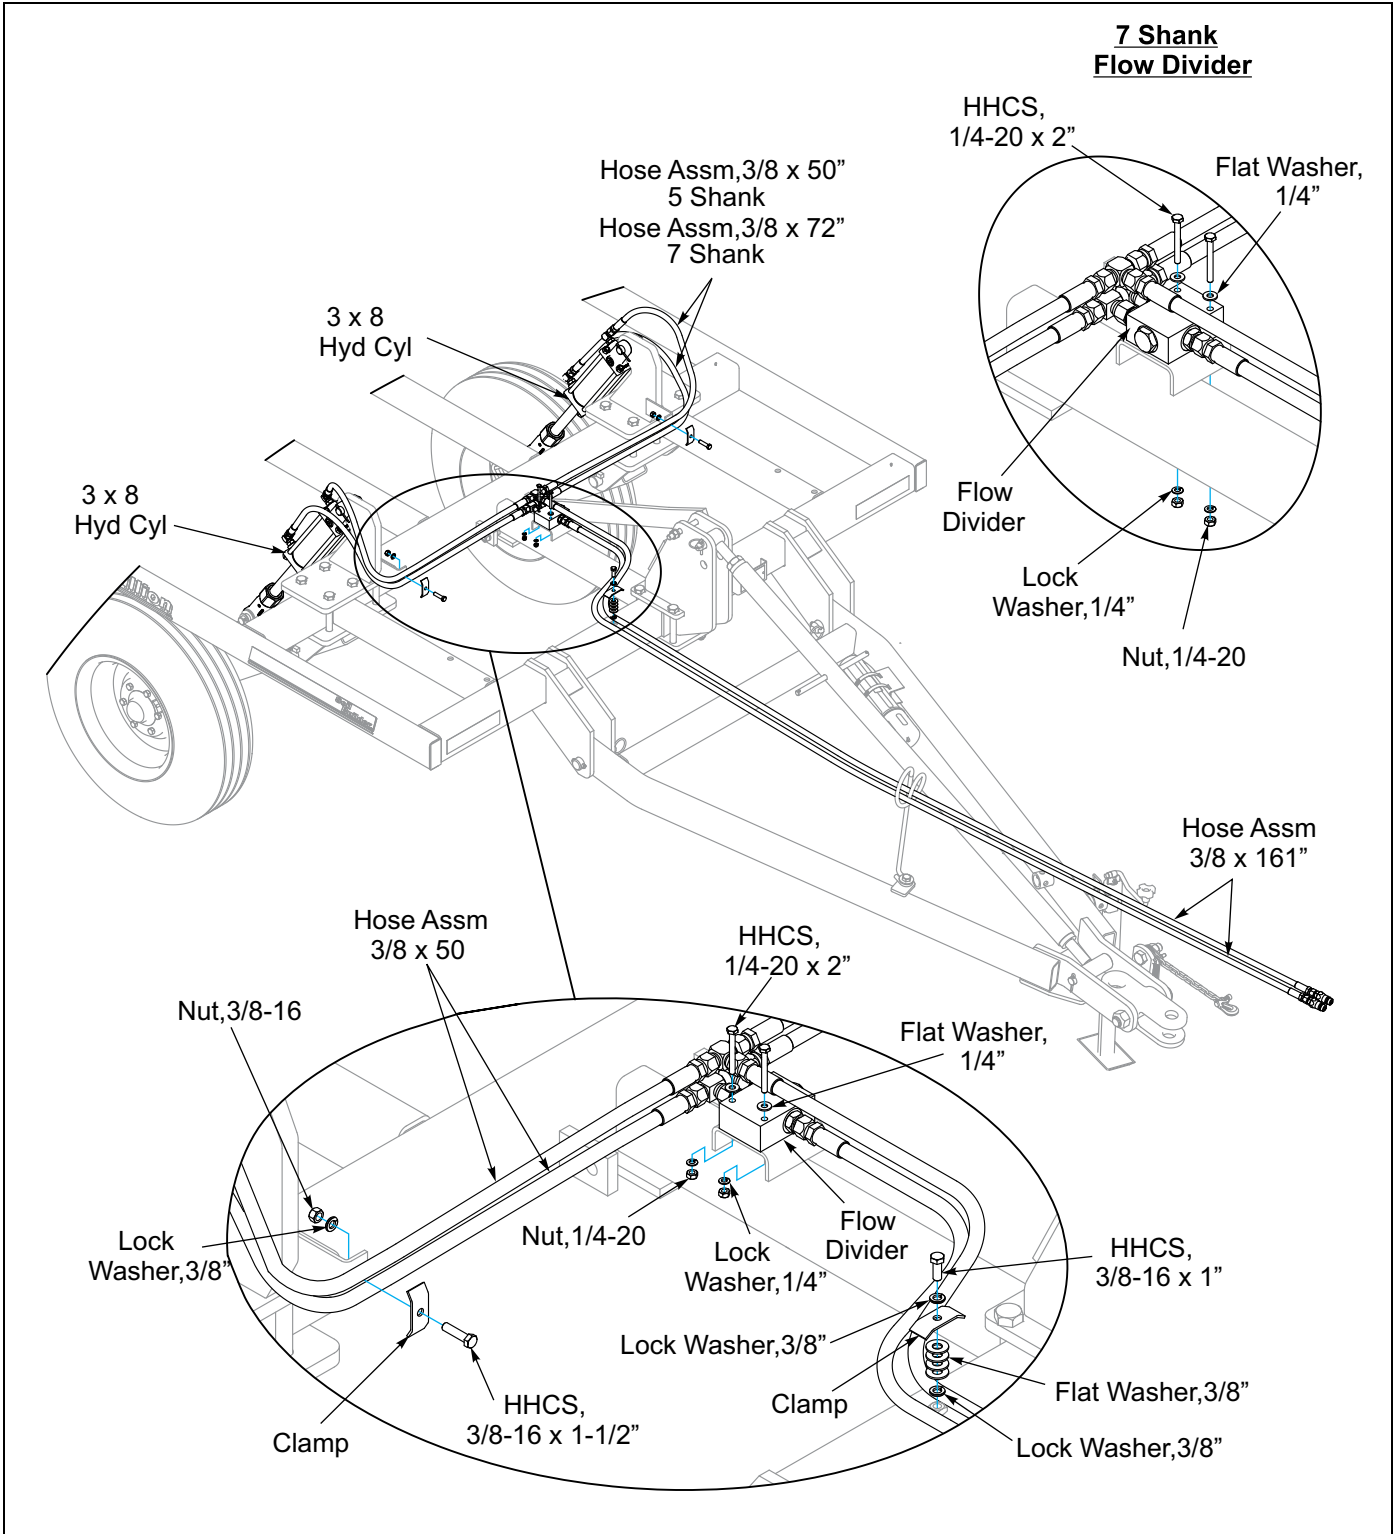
Hydraulic Layout (5 Shank Shown, 7 Shank Similar)
